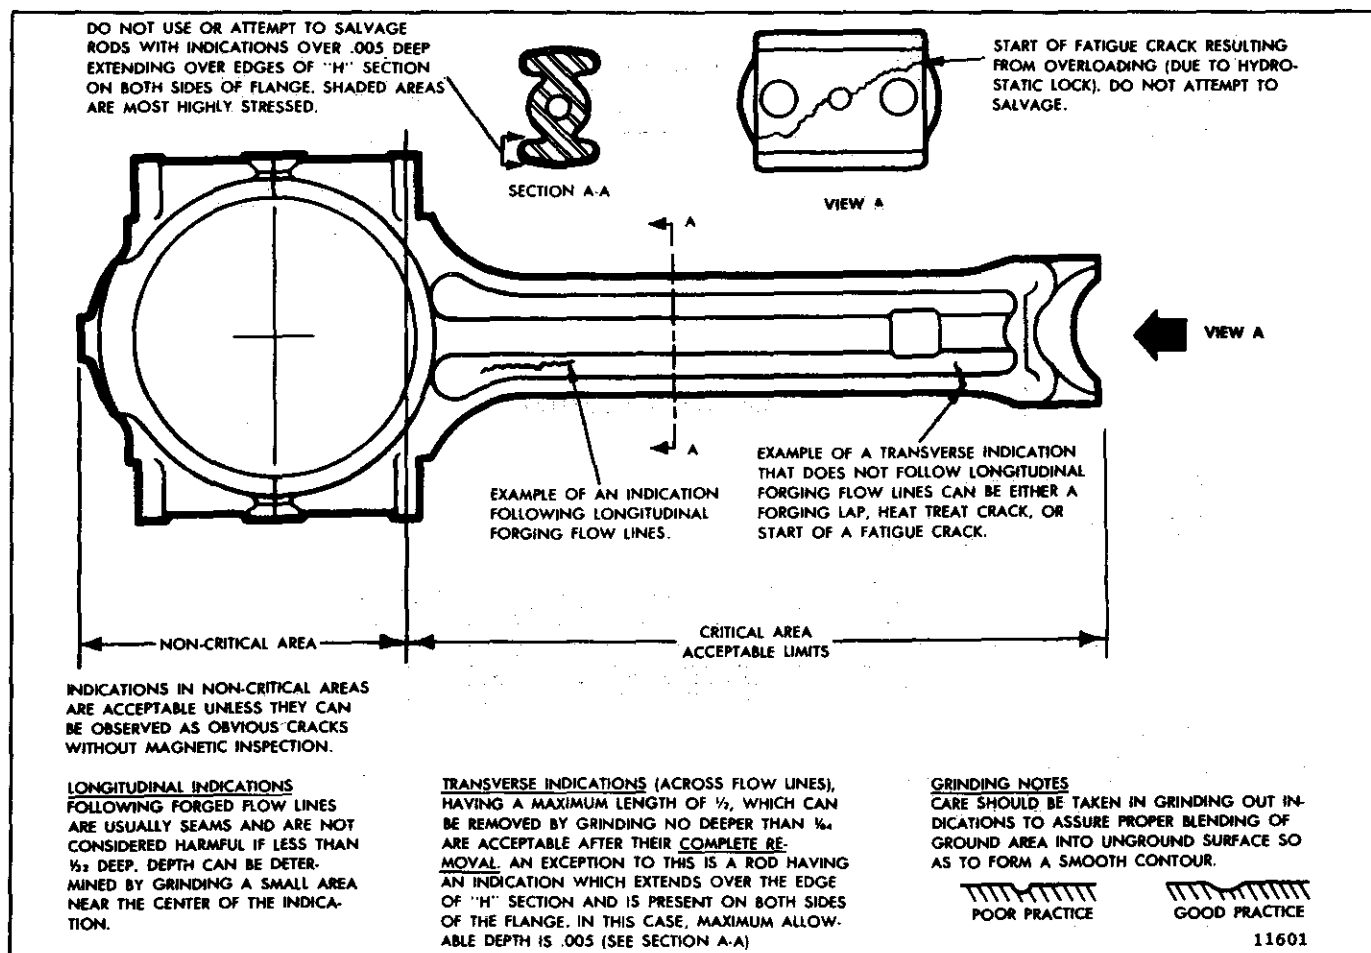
Magnetic Particle Inspection Limits for Connecting Rod
